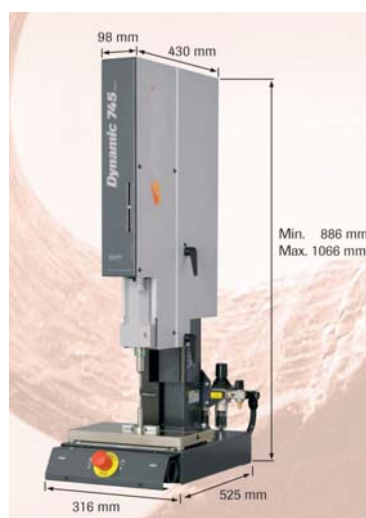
Ultrasonic welding machine. Source: Rinco, 2008
